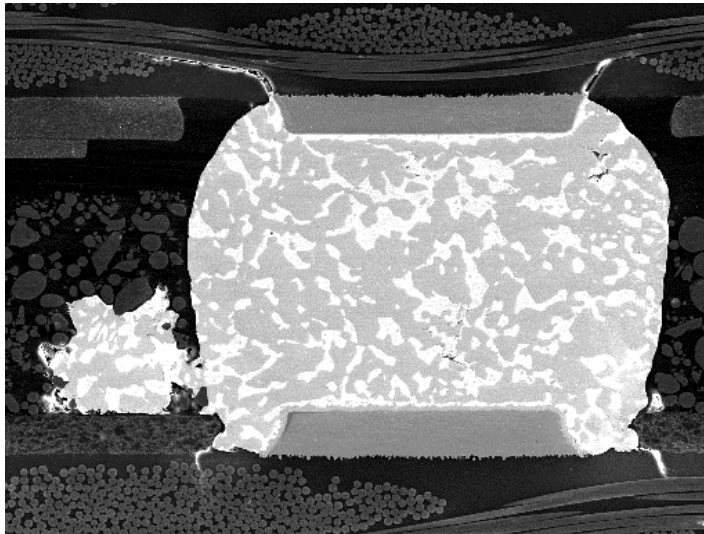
Failure Mode for Underfilled (UF1) BGA Solder Extrusion to Cause Shorting with Filler Separation in the Underfill
